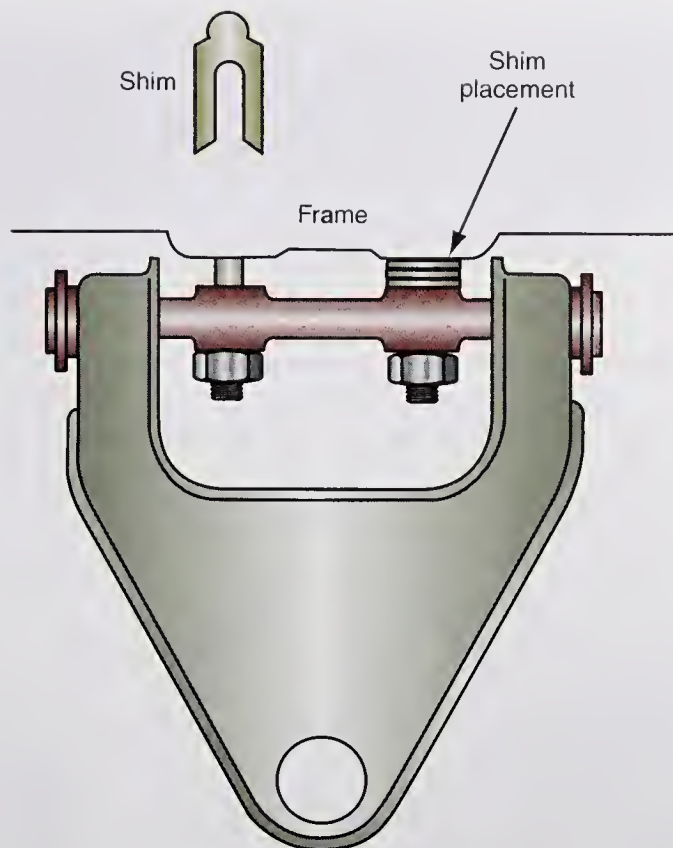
Shim-type camber adjustment between upper control arm mounting and the outside of the frame.
